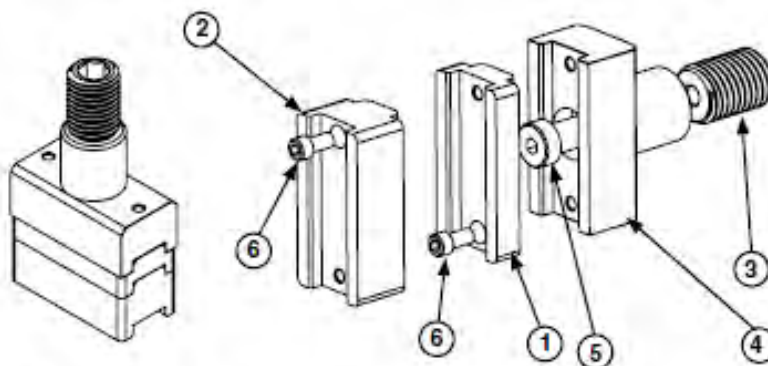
GEAR CLAMP AND HINGE CLAMP ASSEMBLY
